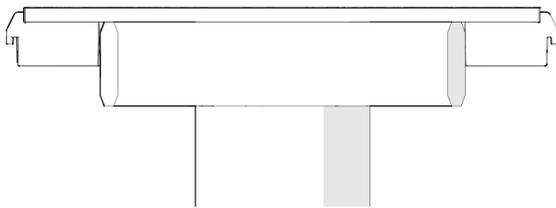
Rotator top plate engages between the inside of pallet bumpers
